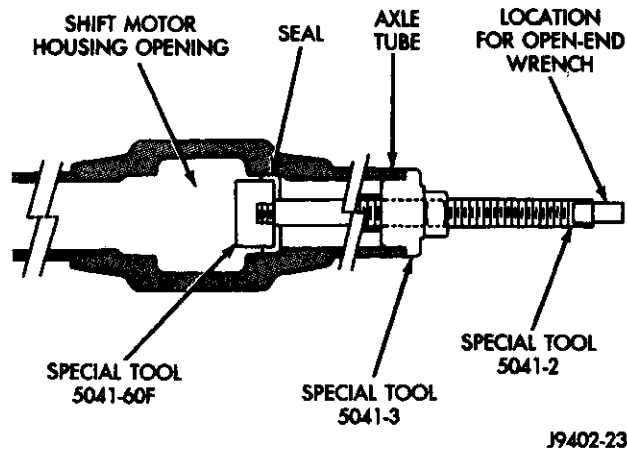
Inner Axle Seal Installation—248 FBI Axle
